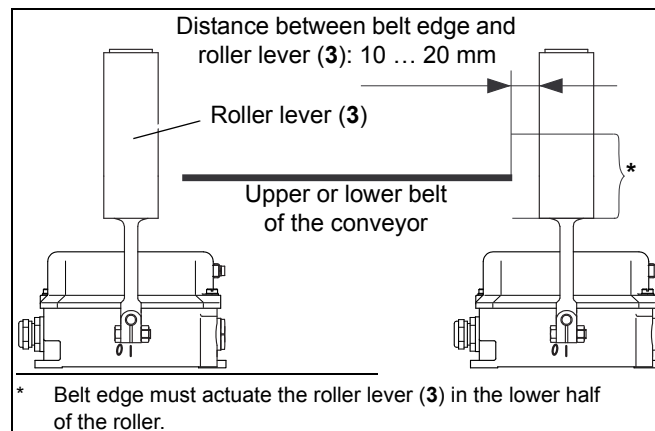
Mounting paired belt misalignment switches on the conveyor
